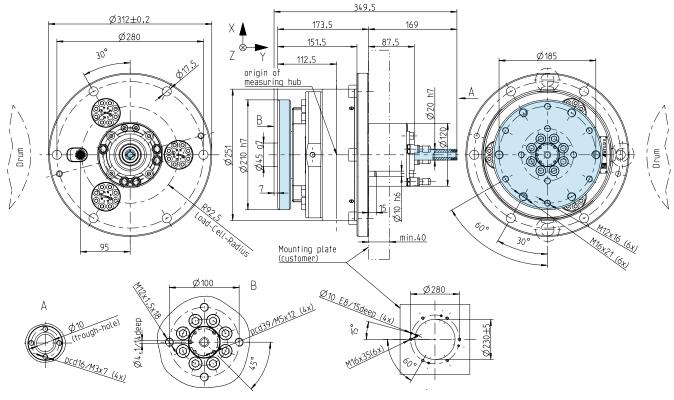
Assembly drawing RoaDyn S220; rotating parts are highlighted in blue
